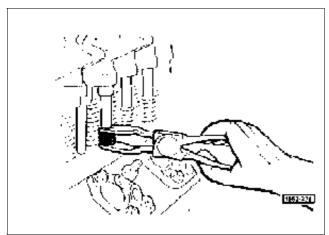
Using a special tool fit the rod cover pipes and the positioning springs;
